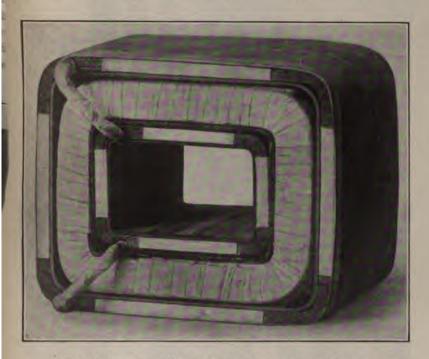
Assembled Set of Coils for a Small 2200-volt Distributing Transformer
